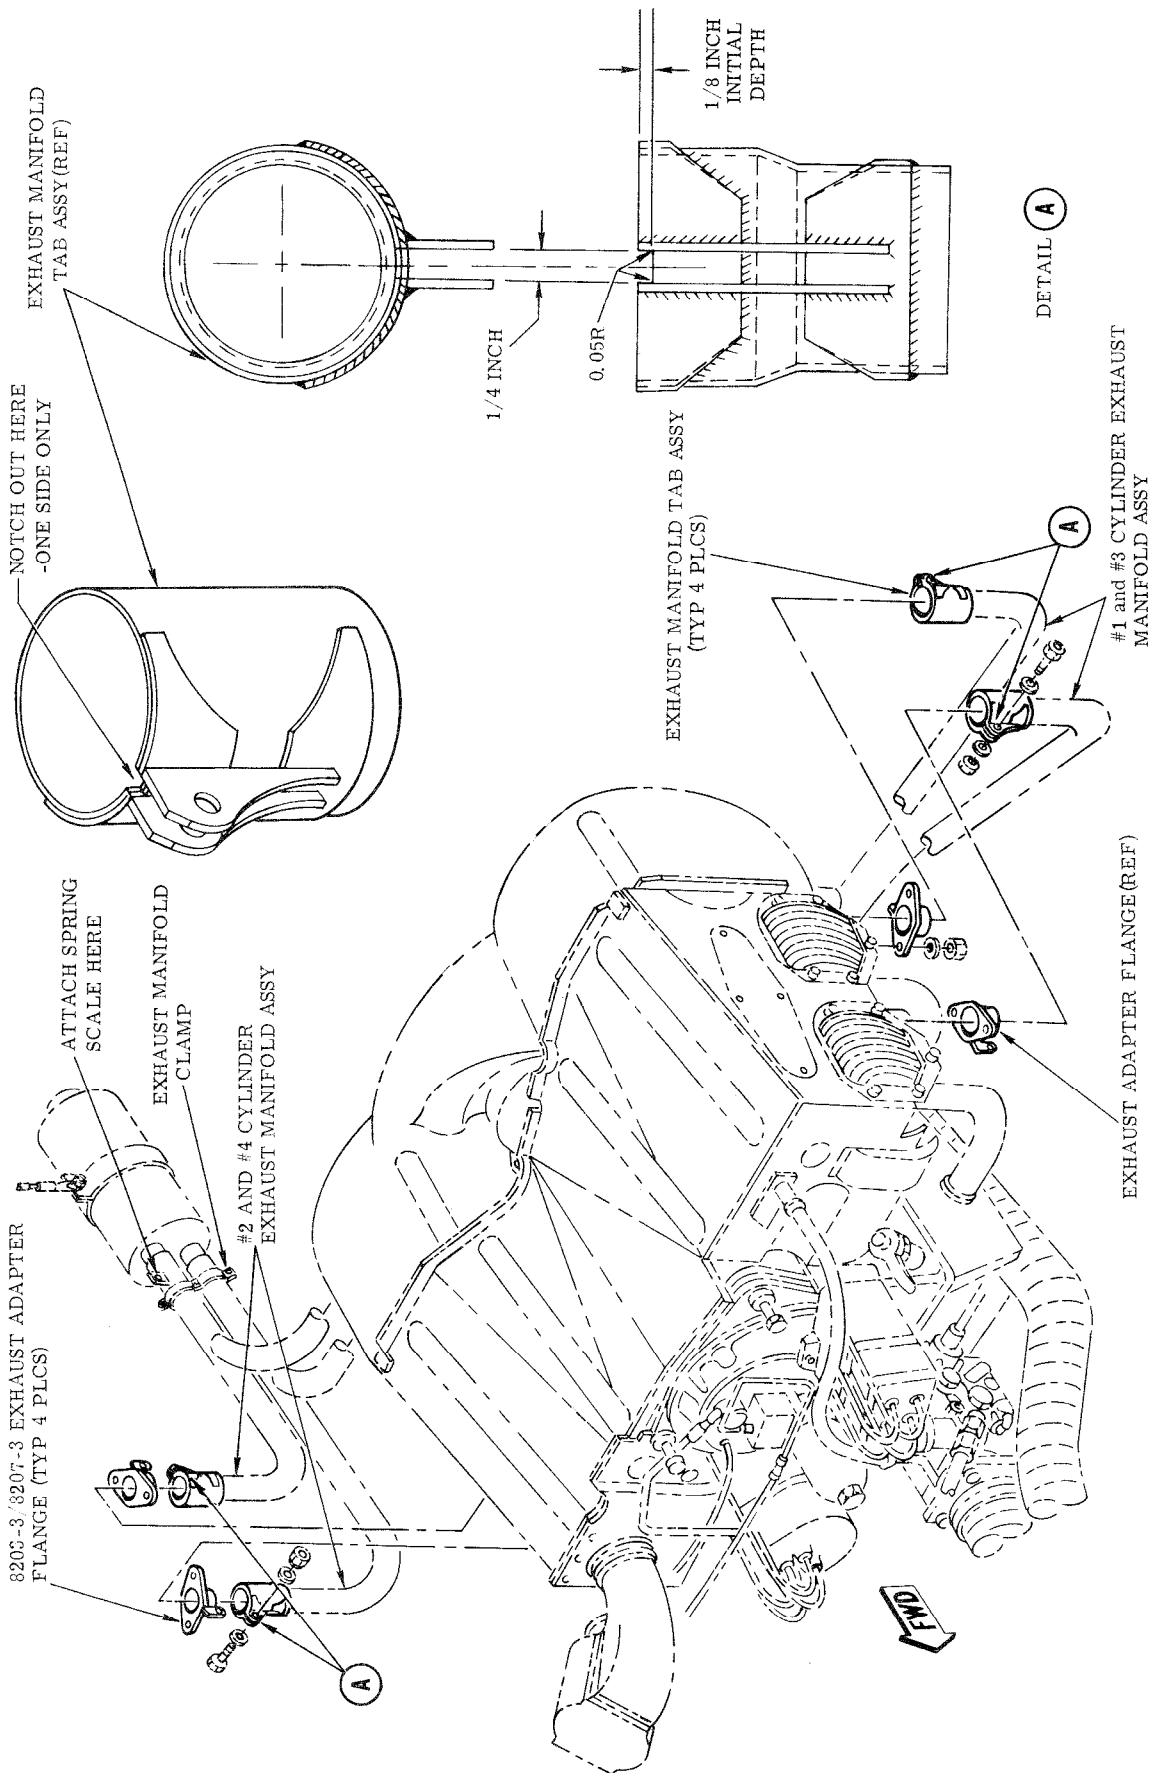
EXHAUST MANIFOLD ASSEMBLY - FIELD MODIFICATION
